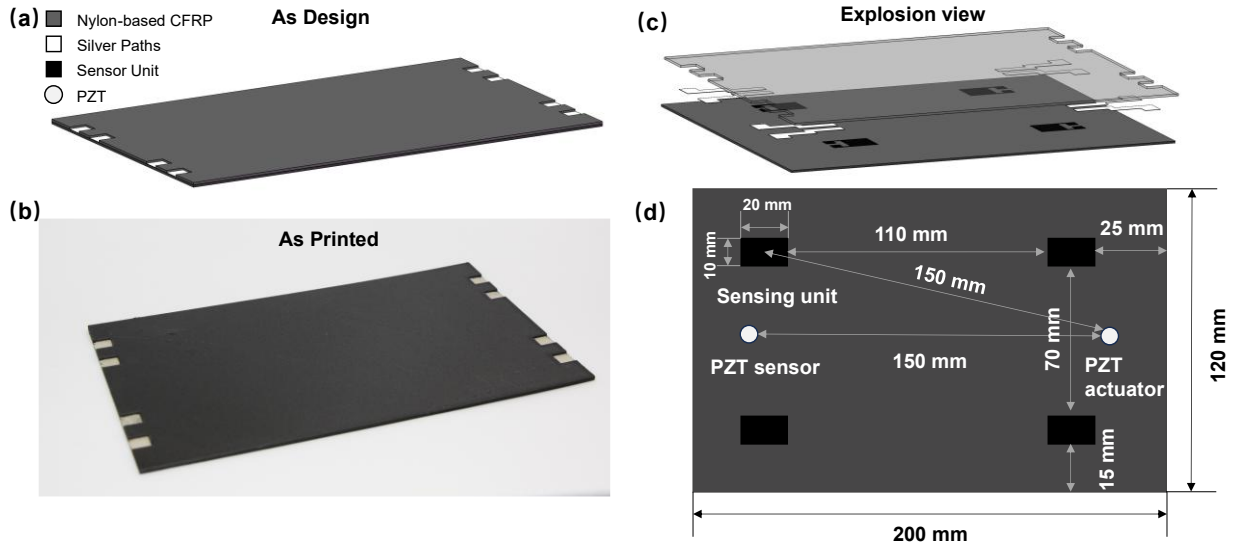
Illustration of the functionalized CFRP laminate of high-frequency GUWs tests: (a) design; (b) prototype; (c) exploded illustration of the sample; (d) the position of sensing units (embedded), and two PZT wafers (respectively as the actuator and sensor, surface-mounted).
